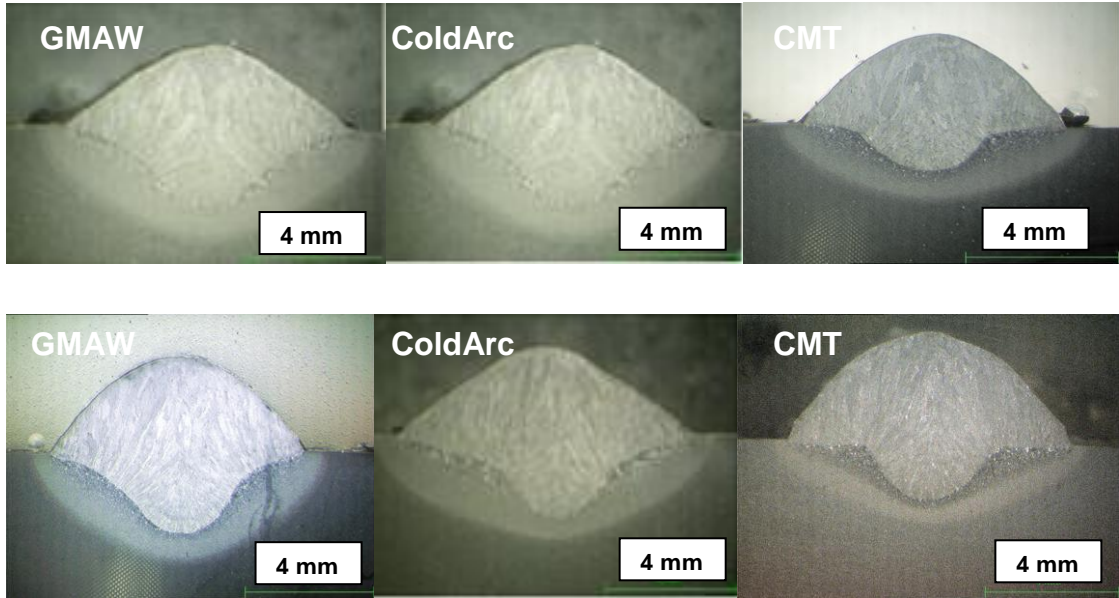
Macrographs showing the welds with (top) 7 m/min WFS and (bottom) 8 m/min WFS
